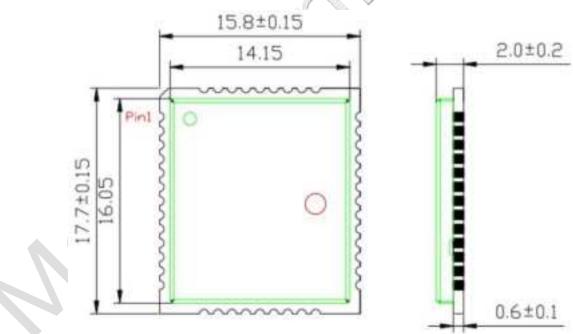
SLM130-NA overlooking and side view dimensions (mm)
